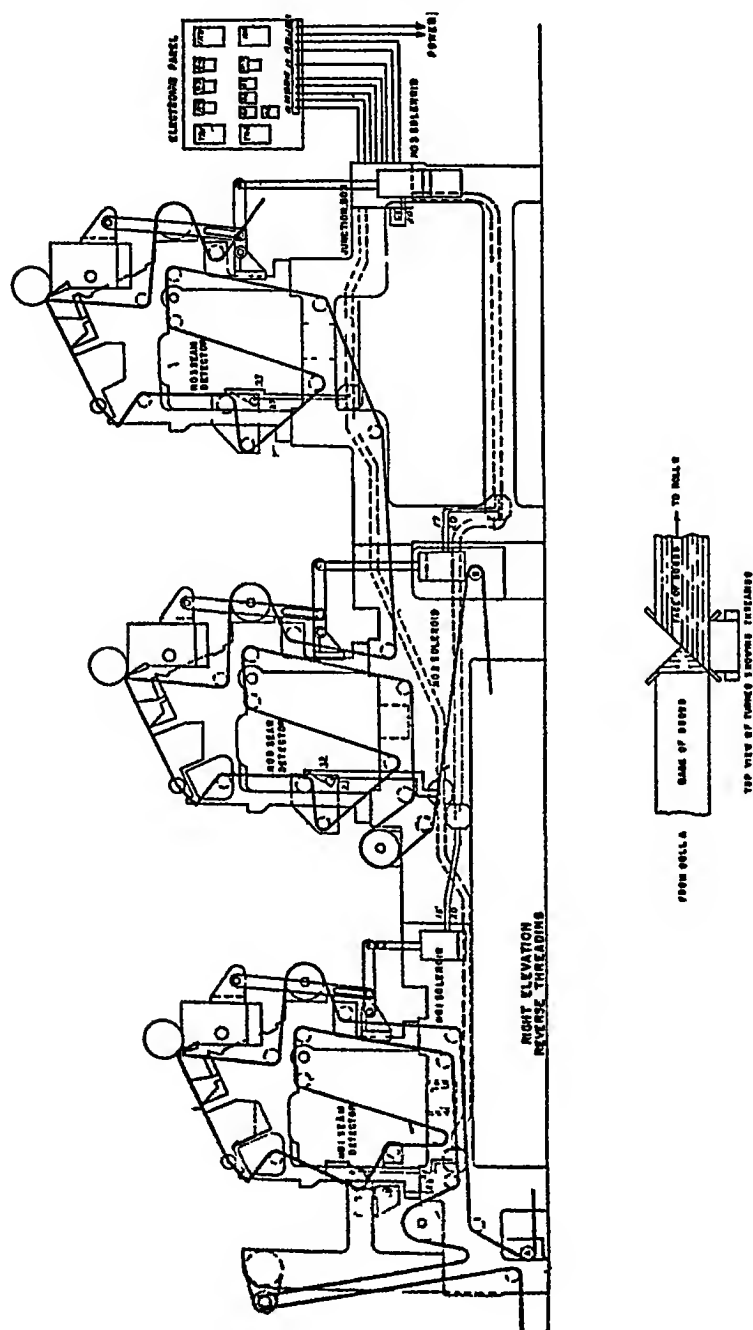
Diagram of three-plate automatic shearing machine shown in Fig 6
